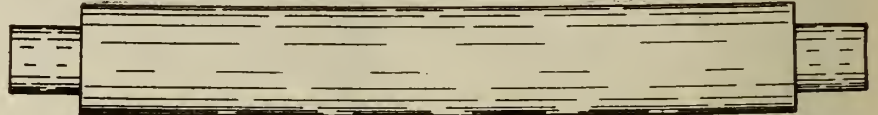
SHOWING OLD WAY OF MAKING COLUMN PATTERN
